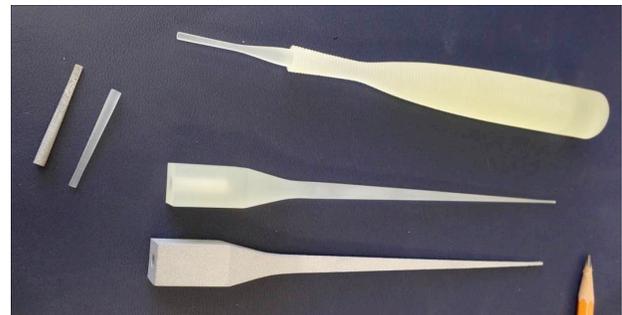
Mandrels made via 3D printing techniques for electroforming millimeter wave components.
